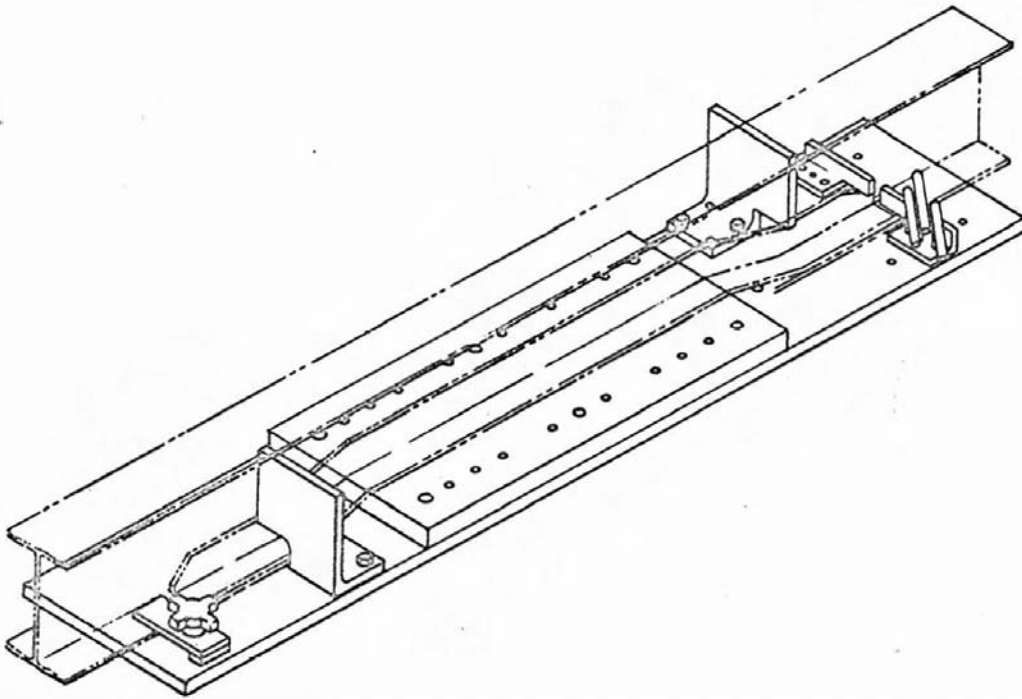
8. Base Heatshield Beam Assembly, Assembly Fixture
